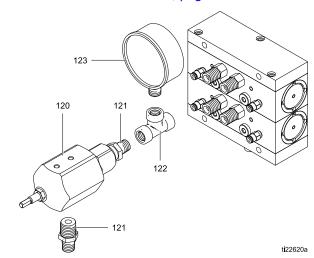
Install Back Pressure Regulator at Dump Valve of Outlet Stack
